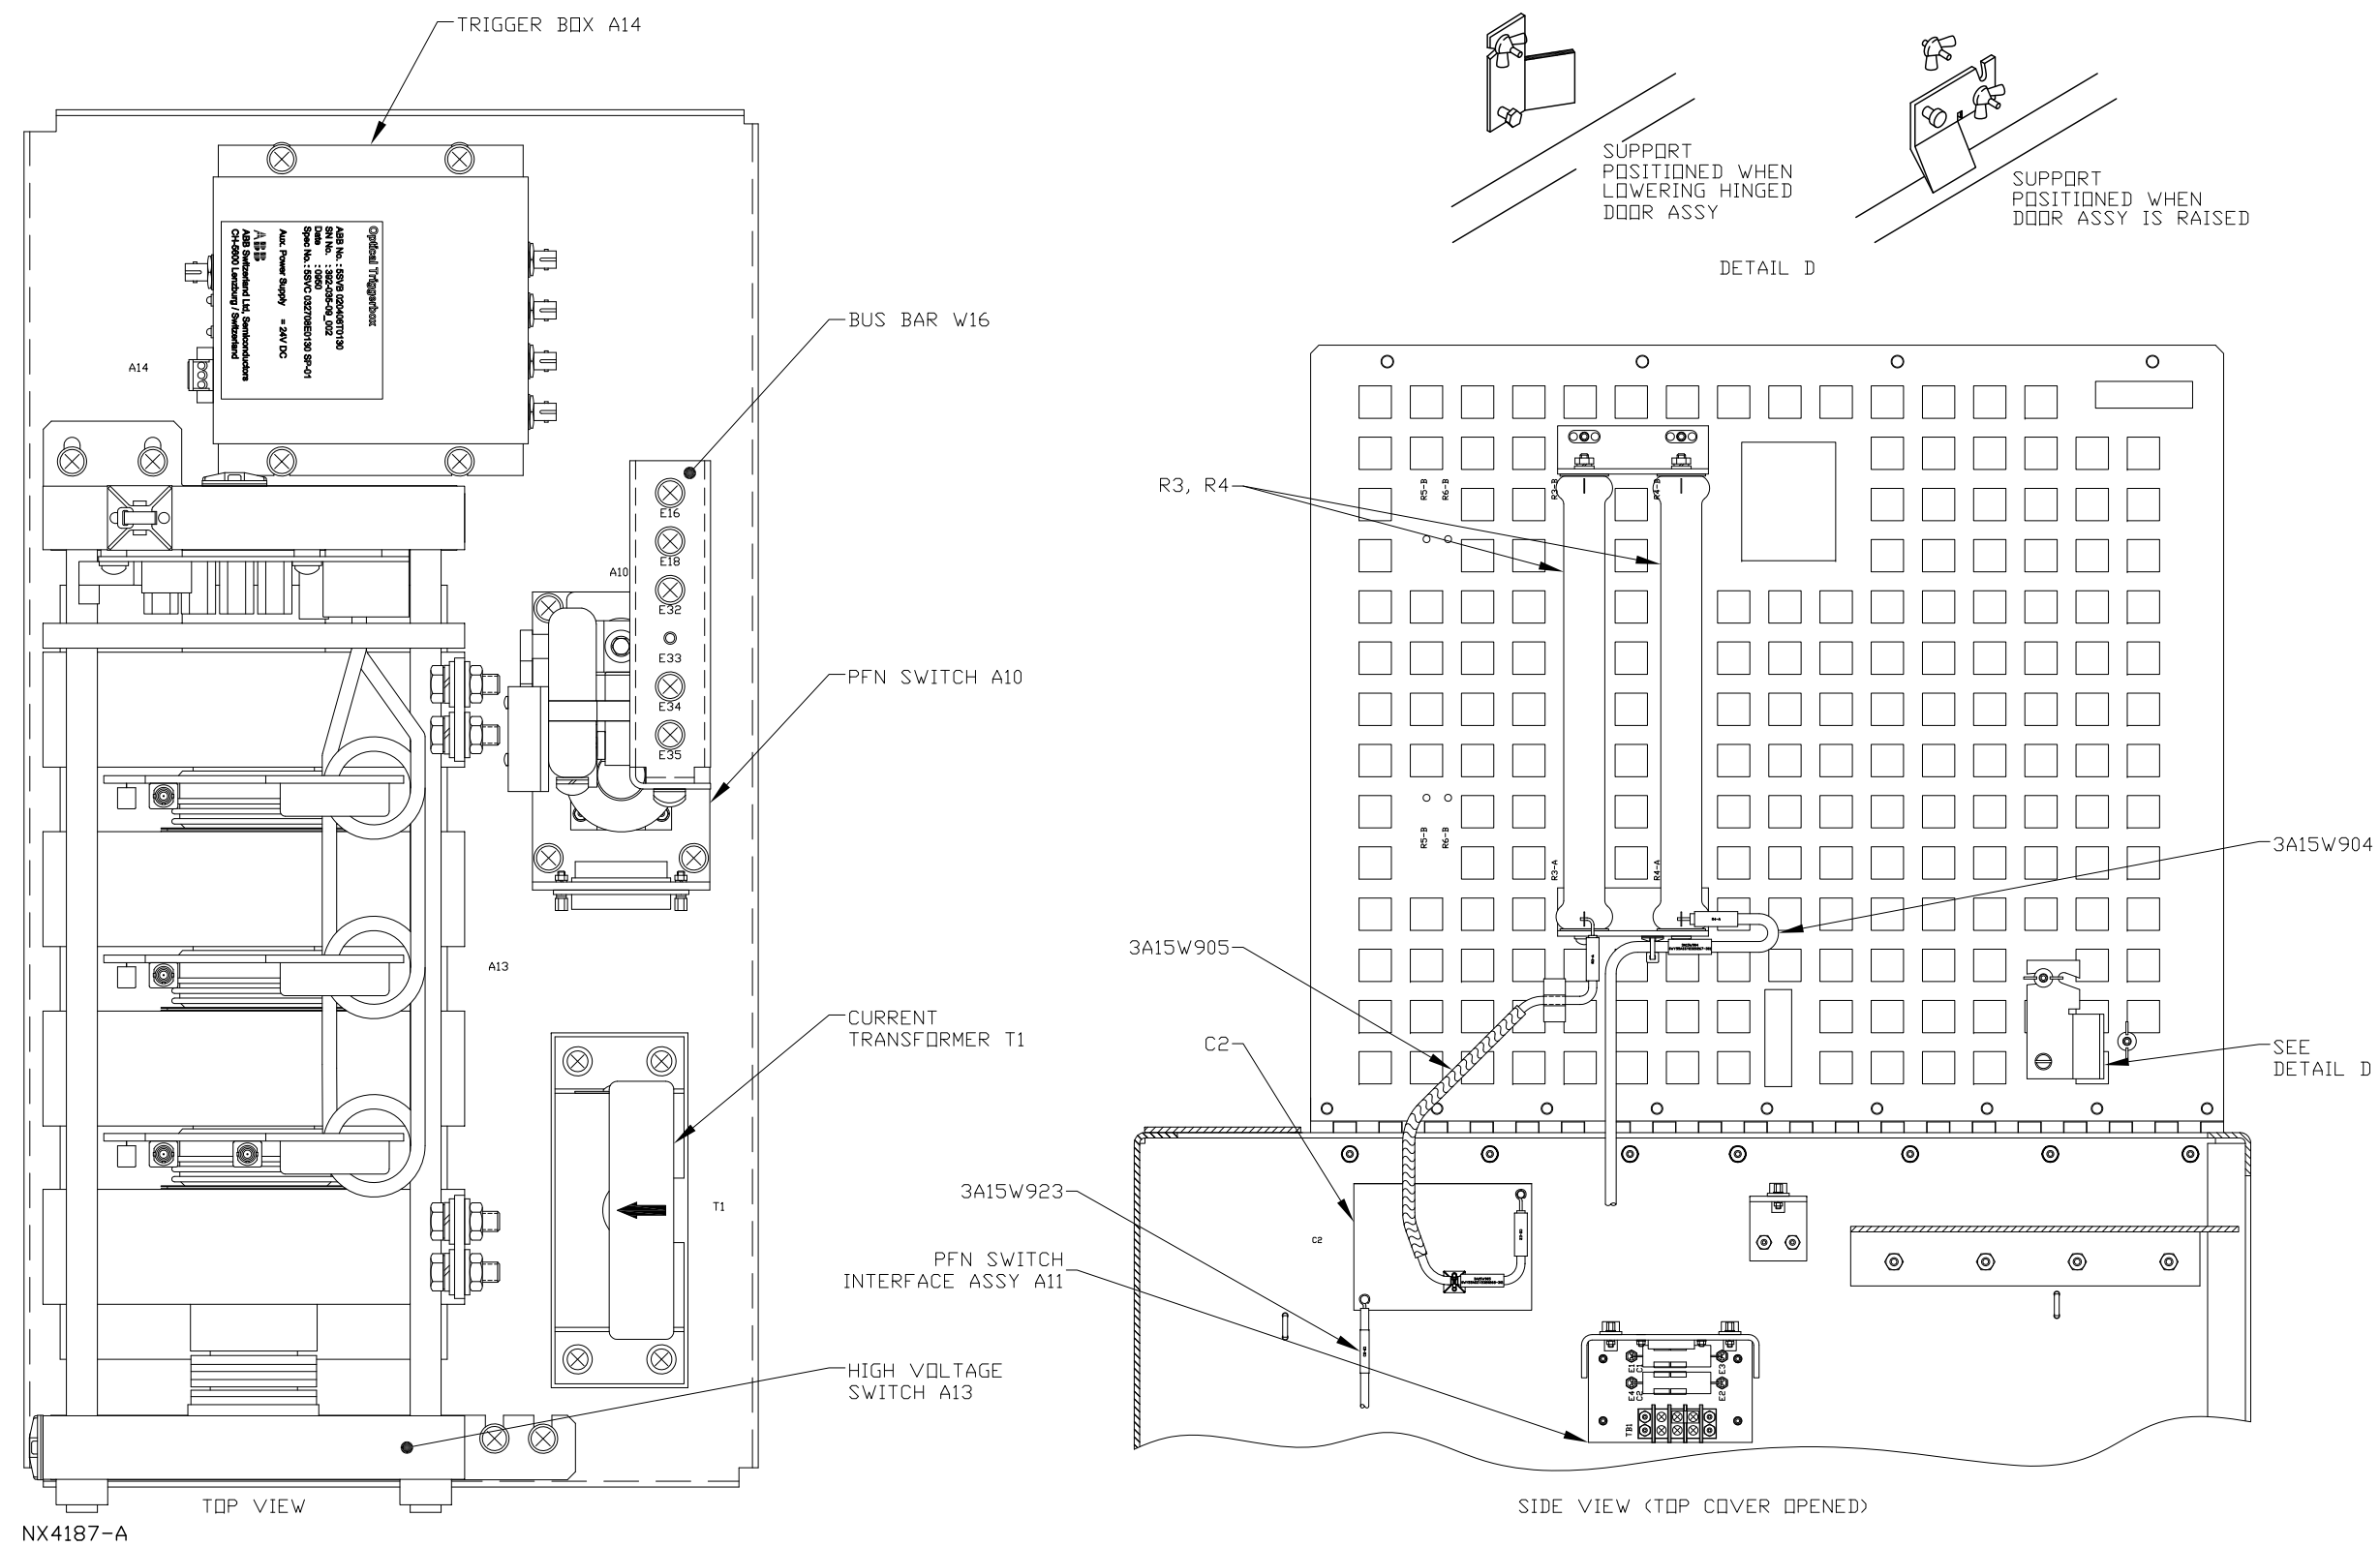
Modulator Pulse Assembly UD3A15 Major Components (Sheet 4 of 5)
